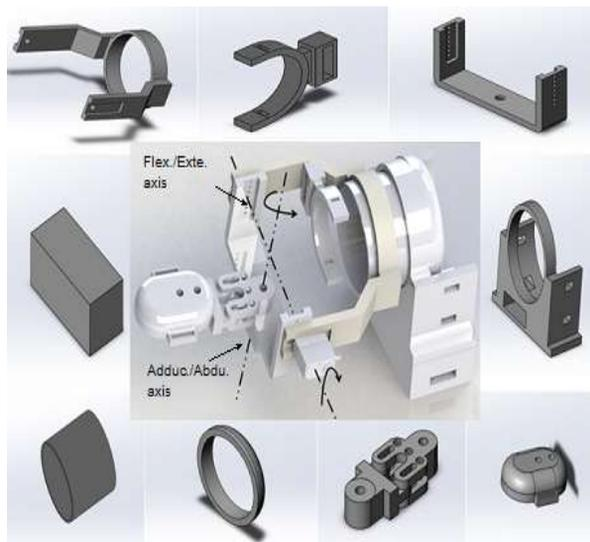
Parts Constructing the Exoskeleton and their Assembly
